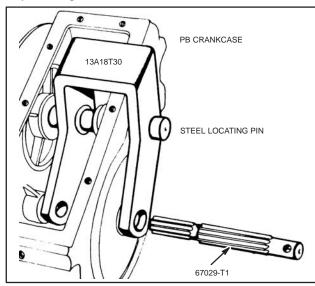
REAMING MODELS D, P, PB CAM BEARING
